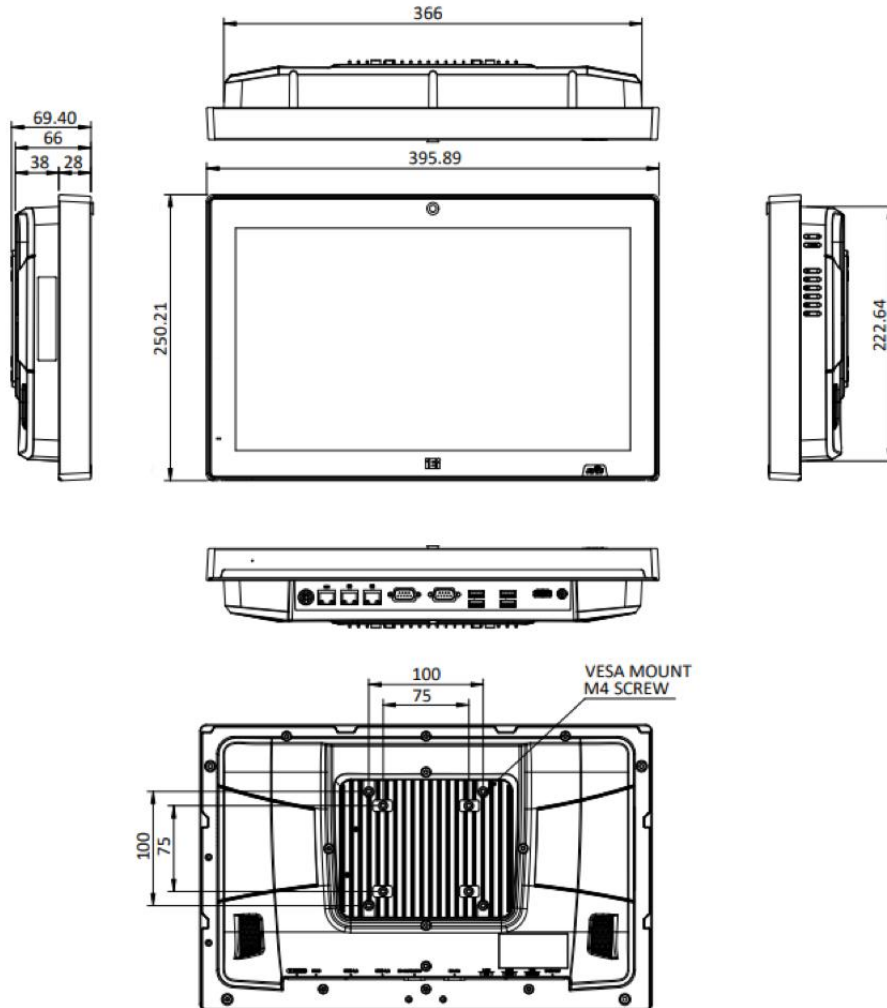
AFL3-W15C-ADLP Dimensions (mm)
